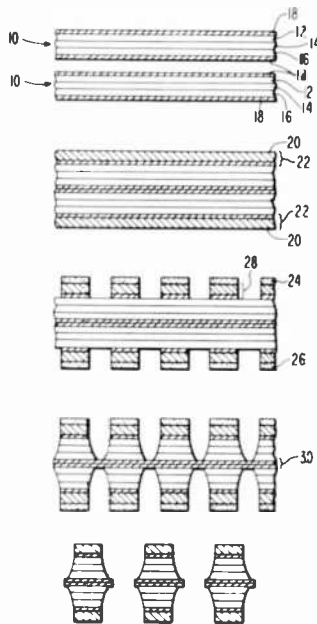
Fabrication steps for mesa diodes stacked back-to-back to form diamond shaped devices.
